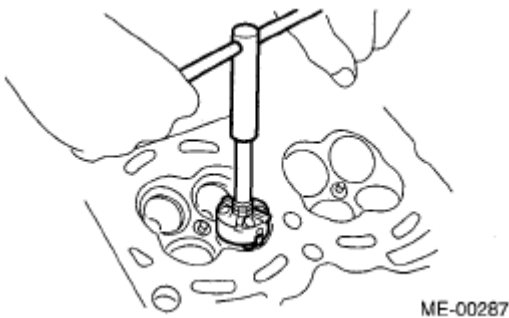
Inspecting Intake And Exhaust Valve Seats
